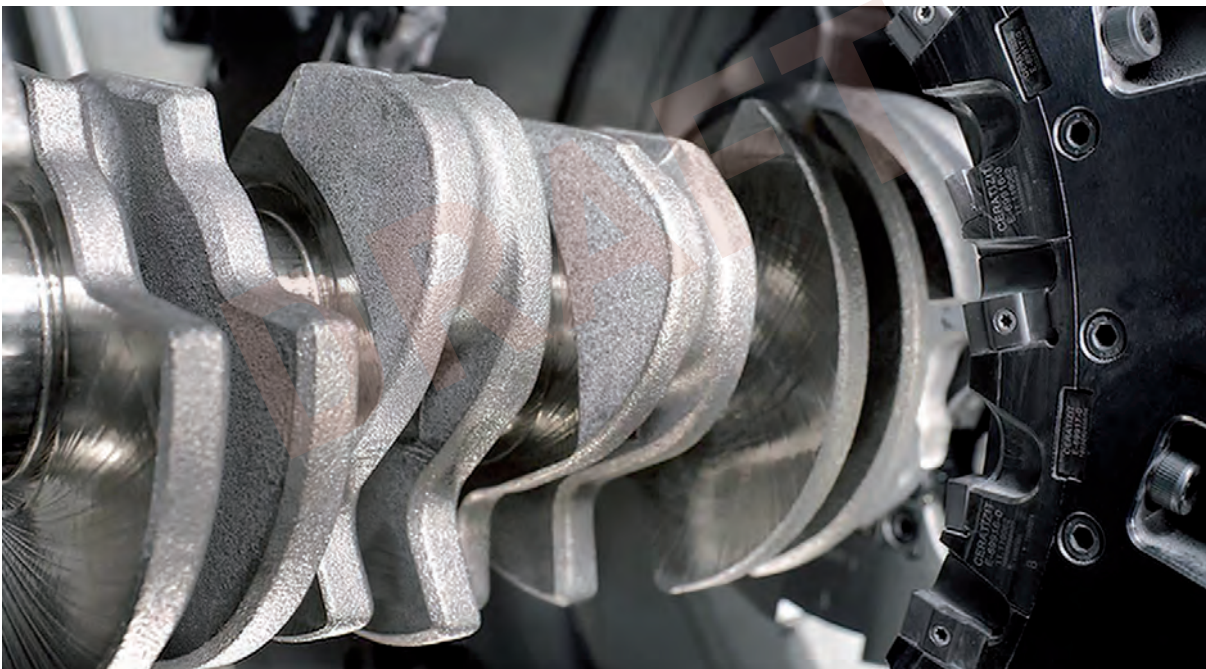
Ring-shaped cutting tool with indexable inserts for crankshaft production (© Ceratizit Austria)
